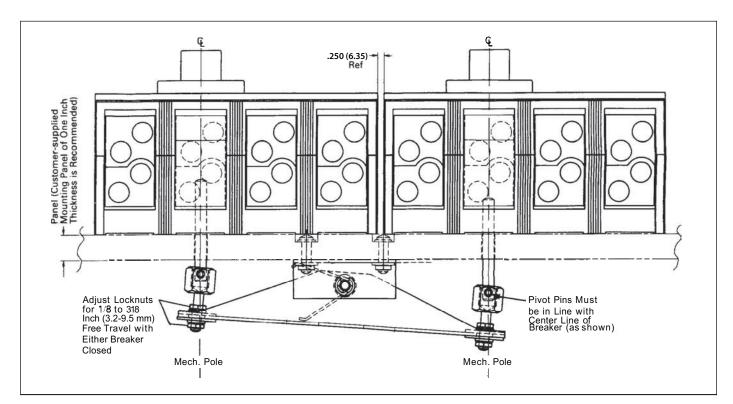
Walking Beam Plunger Adjustment on 4-Pole PD5-Frame Circuit Breaker.
